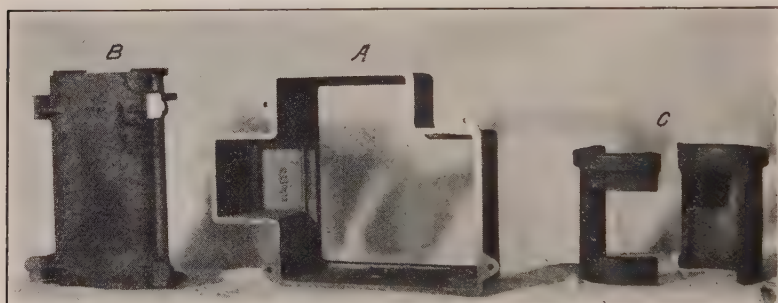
Castings Ground on Horizontal Disc Grinder.
